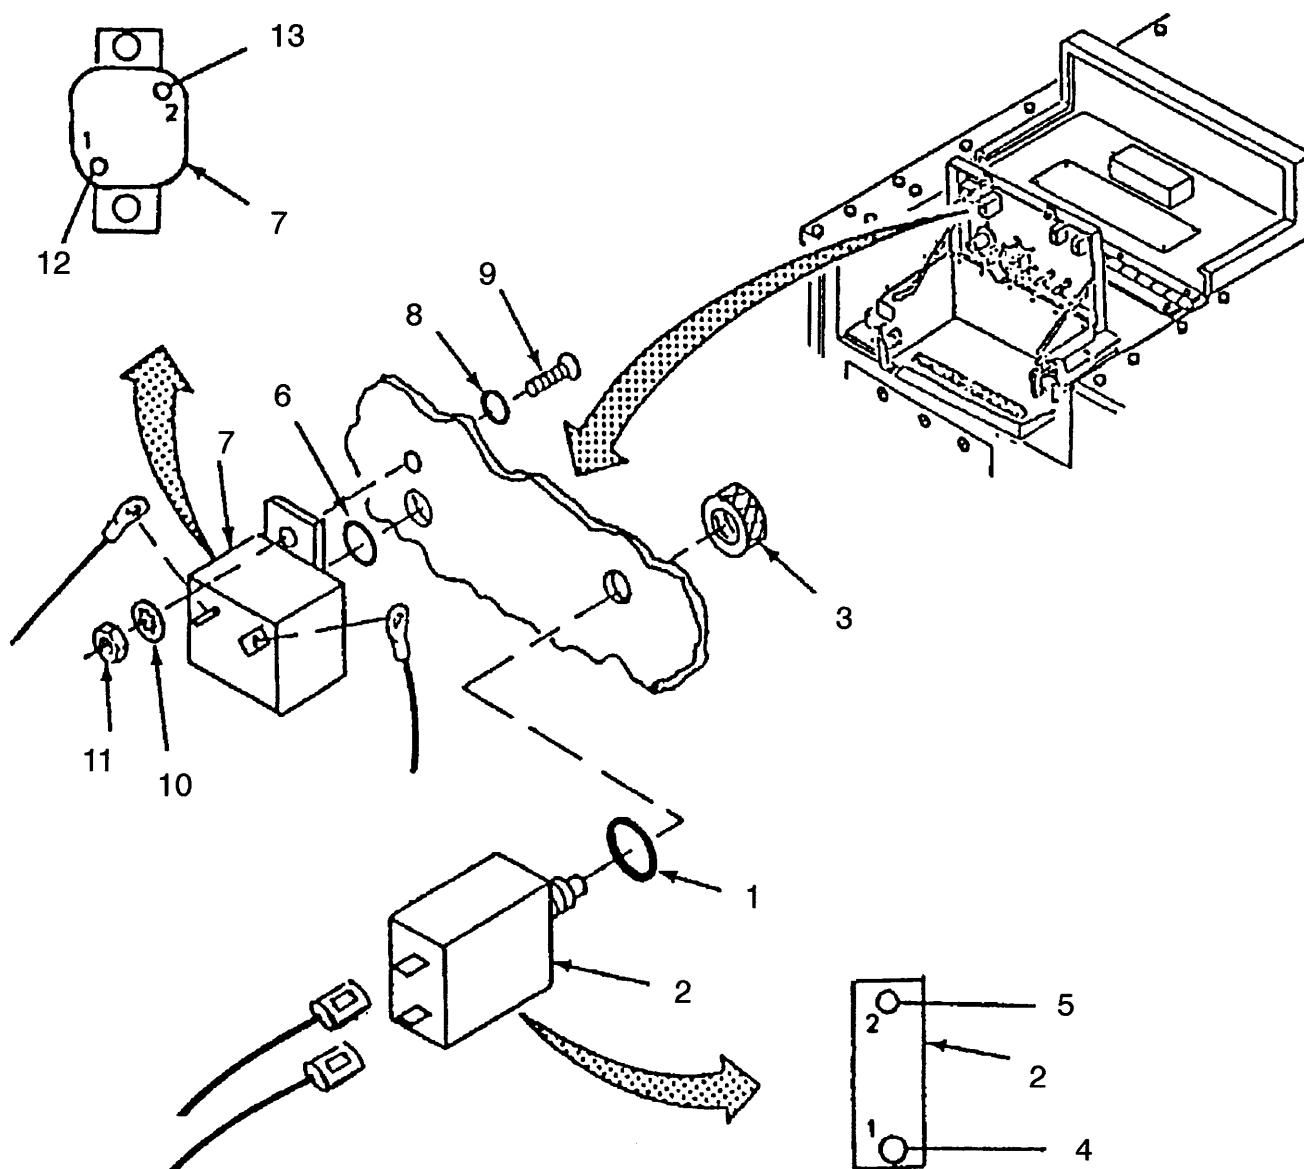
Control Box Assembly, Thermostat and Power Circuit Breakers
